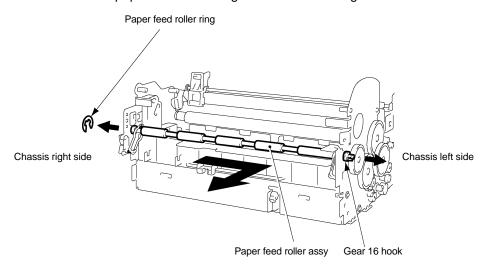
Removing the Paper Feed Roller Assy (1)
